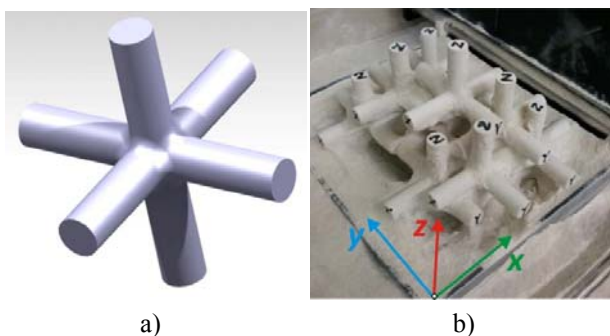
a) 3D CAD geometry of 3DP test part, b) depowdering of unused building material in working chamber of 3DP machine with associated orientations and designations of test samples
